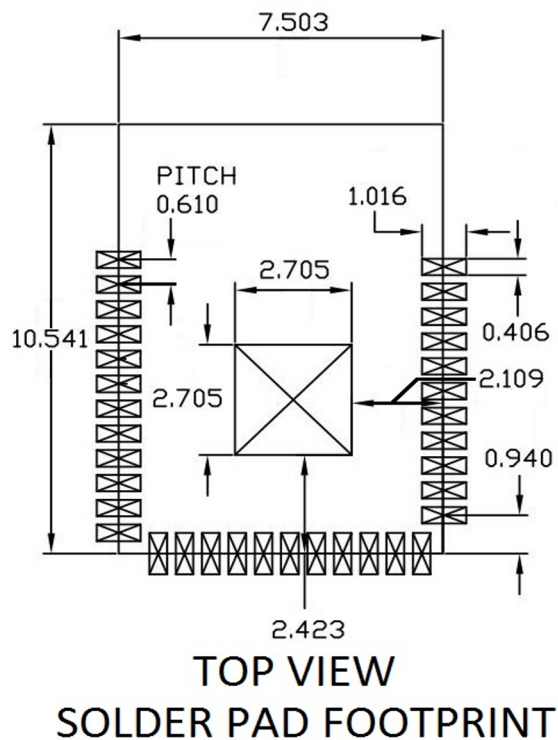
ATBTLC1000-ZR110CA Module Package Outline Drawing
